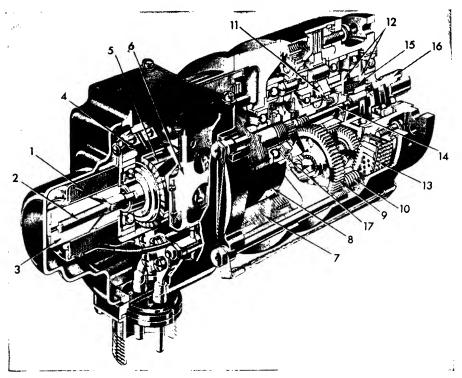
A sectional view of a landing gear retraction motor: (1) Solenoid; (2) Push rod; (3) Solenoid core, movable; (4) Brush; (5) Commutator; (6) Brush holder; (7) Stator; (8) Armature; (9) First stage planetary gearing assembly; (10) Clutch springs; (11) Second stage planetary gearing assembly; (12) Engaging jaws; (13) Clutch packs; (14) Push rod bumper; (15) Jaw spring; (16) Output drive shaft assembly. (Courtesy Jack & Heintz, Inc.)
